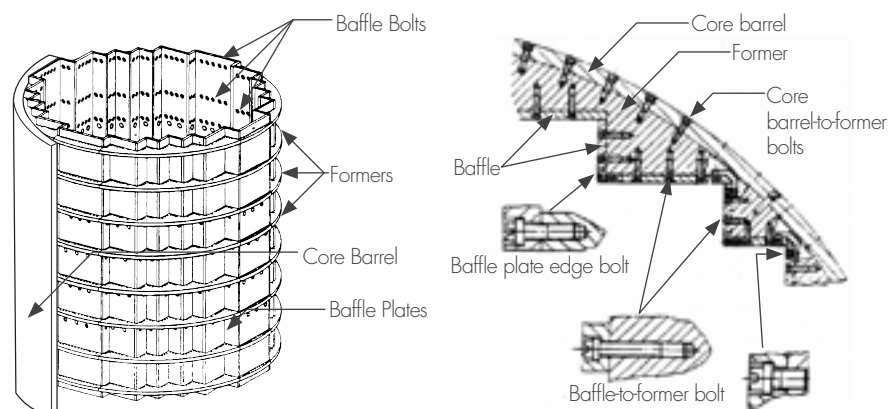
Views of Baffle-Former Assembly Showing Bolt Arrangement
